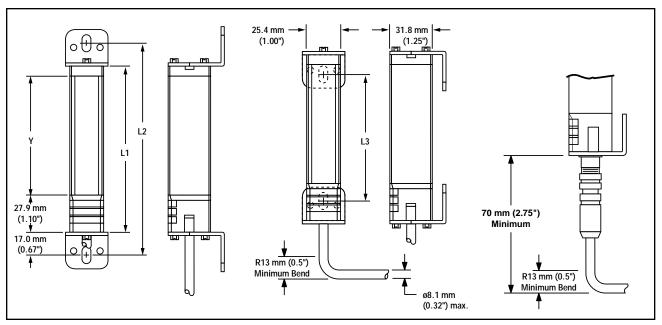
Emitter and receiver mounting dimensions and location of defined area
